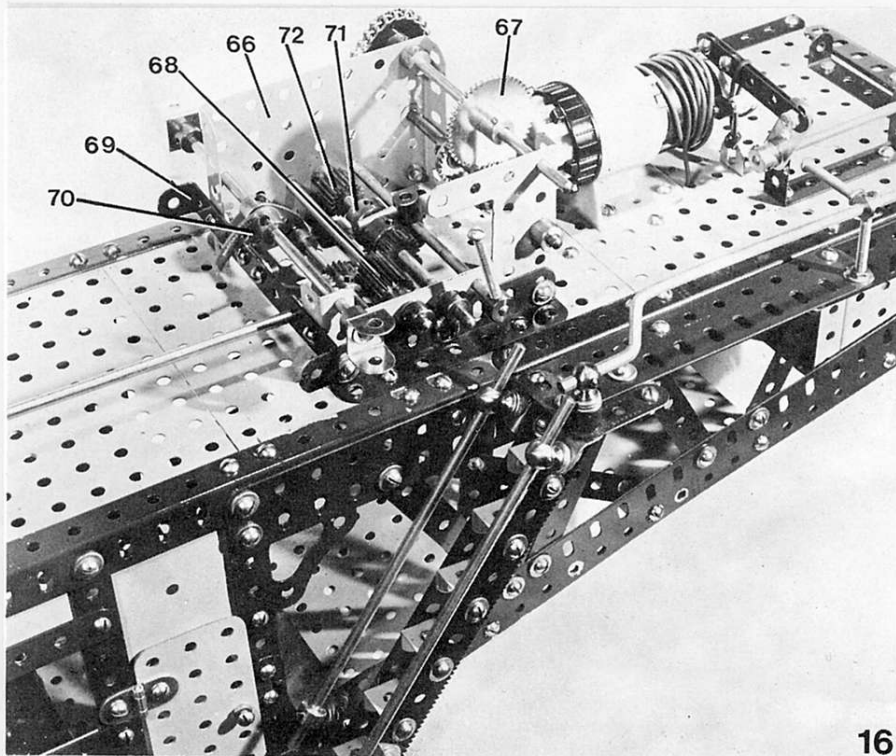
, another close-up view of the hoist and trolley winch, this time with the winding drums and one side plate removed to show the gearing and control linkages. Again, attention should be drawn to the very solid construction of the deck, thanks to the liberal use of Flat Plates.
